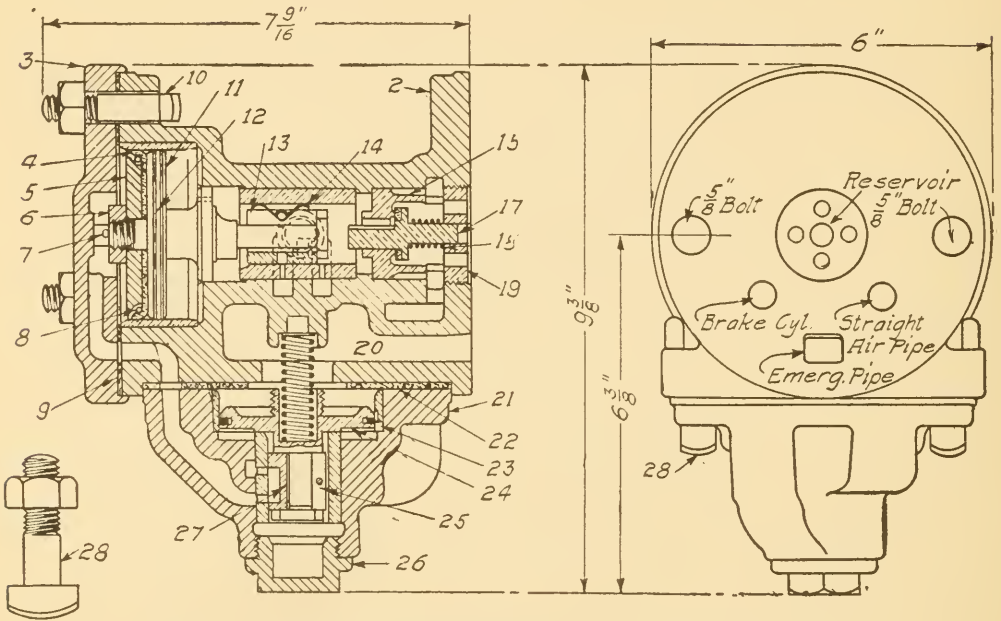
Actual Section and End View of Westinghouse Type "D" Emergency Valve
